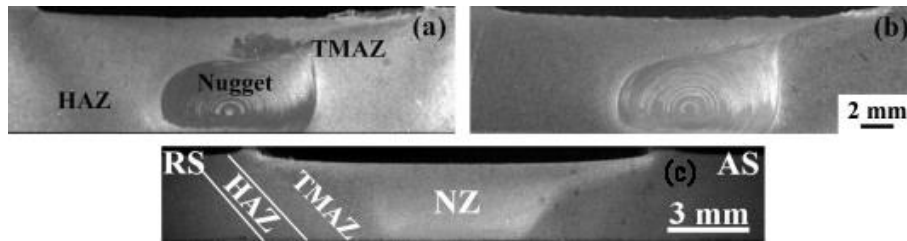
FSW of AA2009/SiC/15 weight percent with rotational speed of 600 rpm with travel speed of 50mm / min (a) as welded, (b) T4 condition showing onion ring weld zone [118]; (c) FSW with rotational speed of 1000 rpm [119]; where the nugget zone (NZ), thermomechanical zone (TMAZ), heat affected zone (HAZ), advancing side (AS) and retreating side (RS) are indicated.
